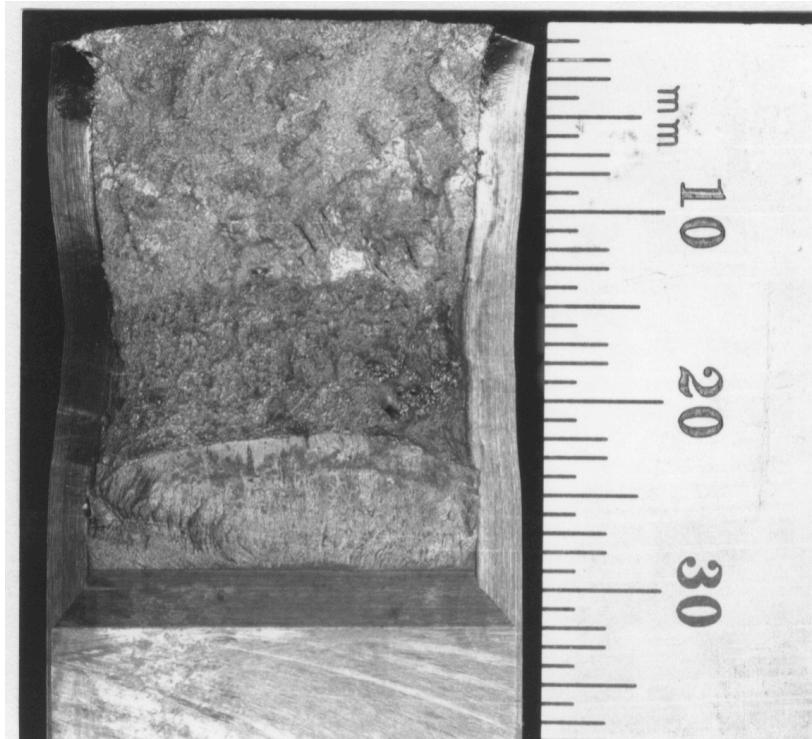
Fracture surface of the cold-leg check valve CA4 tested at room temperature after 13 y of service at 264°C
